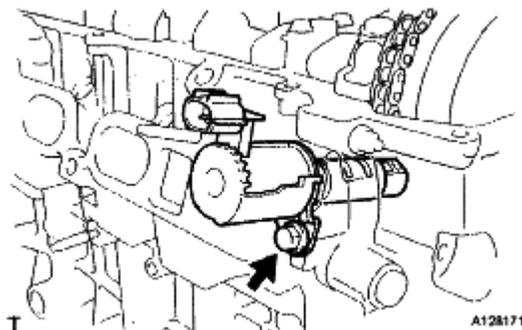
Locating Camshaft Timing Oil Control Valve With Bolt
